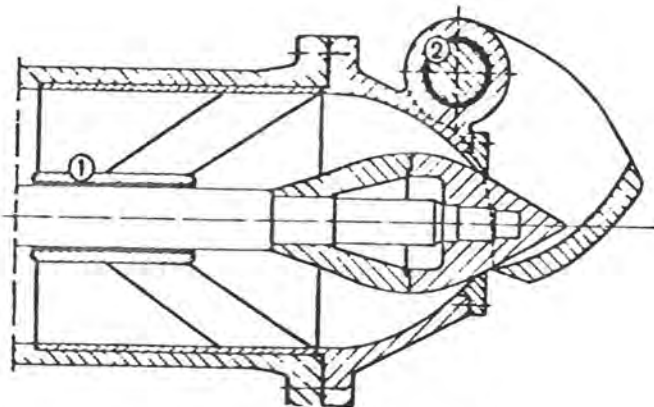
Jet pin bearing (1) and deflectors (2) in Pelton turbines
